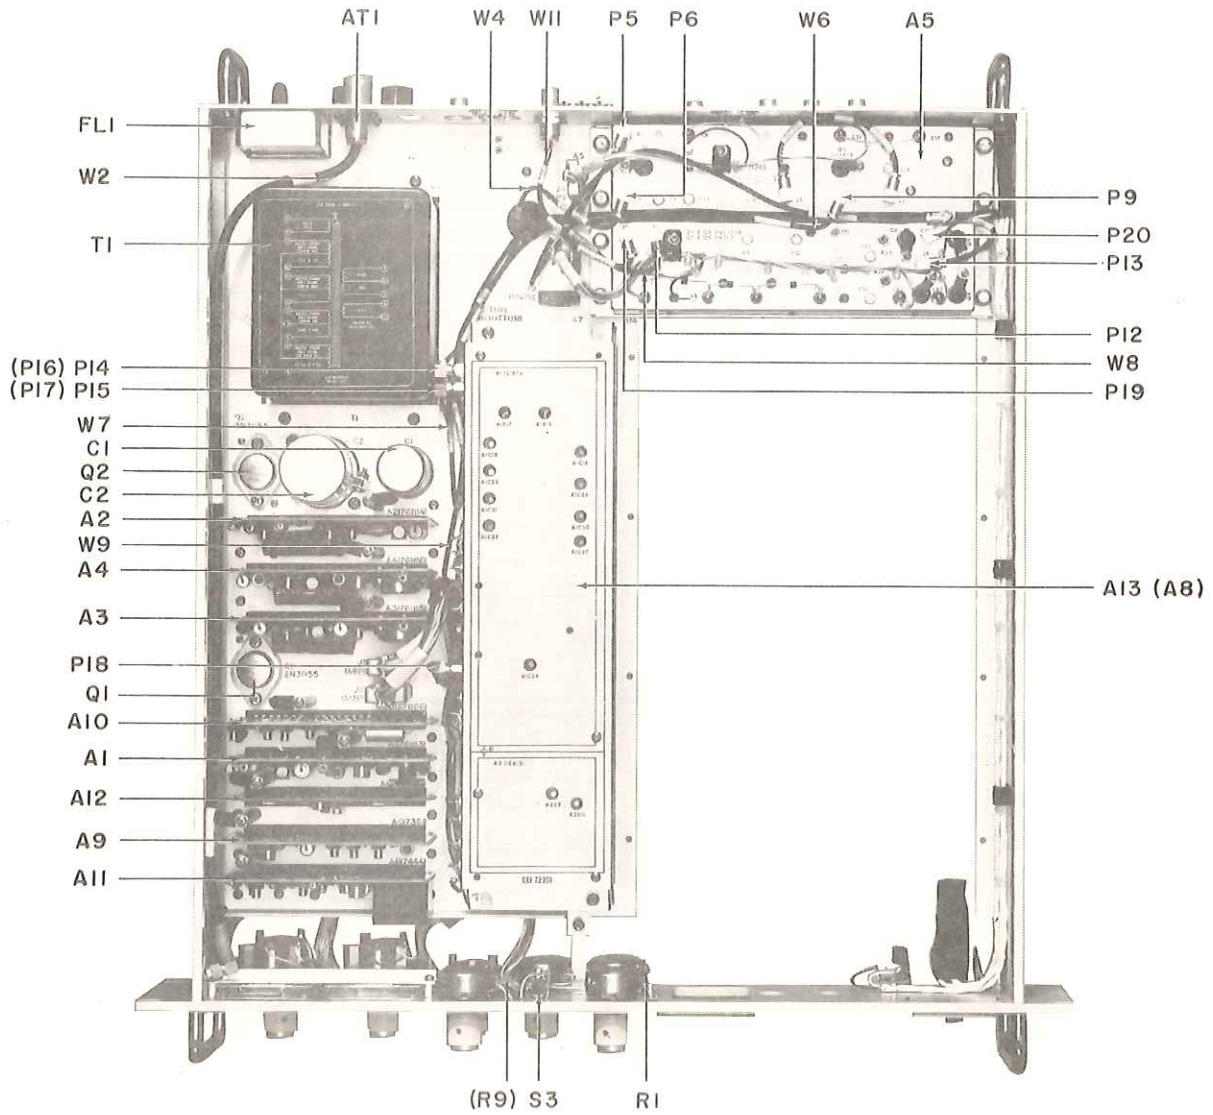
Type 112 Receiver, Top View, Component Locations
